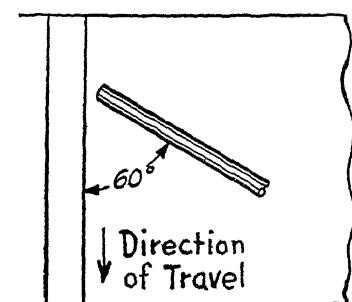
Position of electrode for making fillet welds in flat position.
